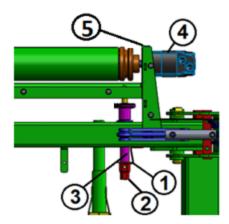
Motor End Adjustment Key 1 – Lock Key 2 – Shaft Key 3 – Adjuster Key 4 – Motor (ref) Key 5 – Roller Alignment
